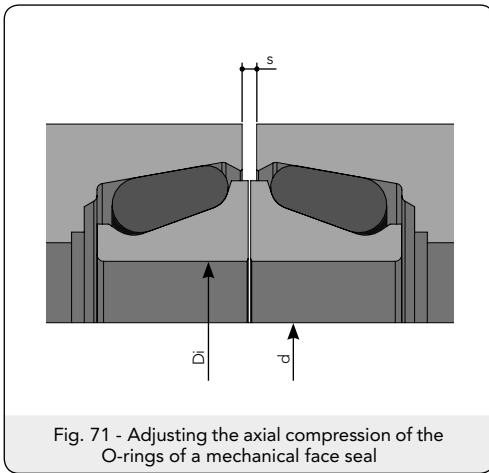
Adjusting the axial compression of the O-rings of a mechanical face seal
